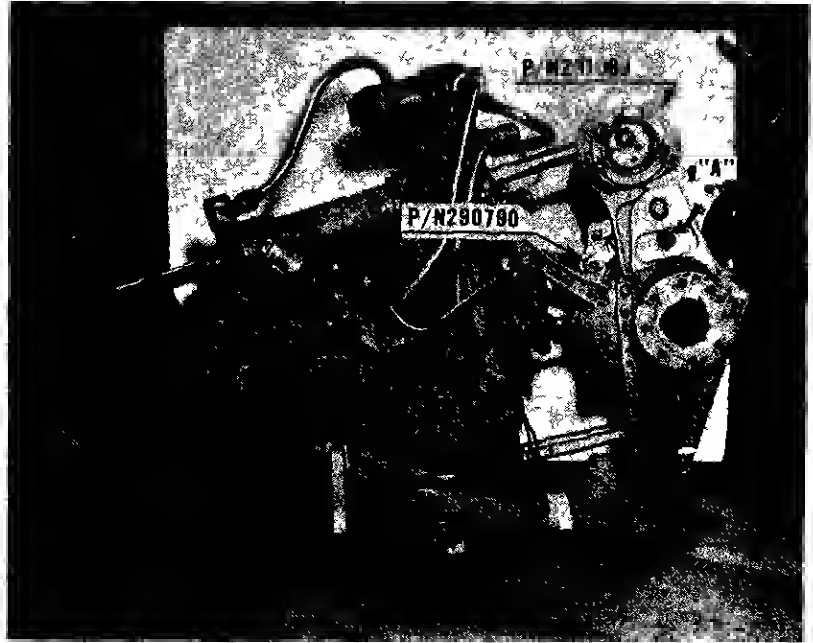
Elevator boost package. Bushing where bolt should have been is indicated by arrow "A".
